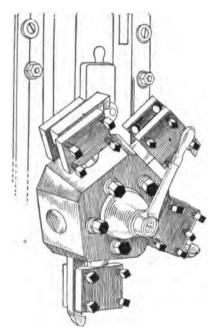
TURRET HEAD HOLD-ING FOUR TOOLS
